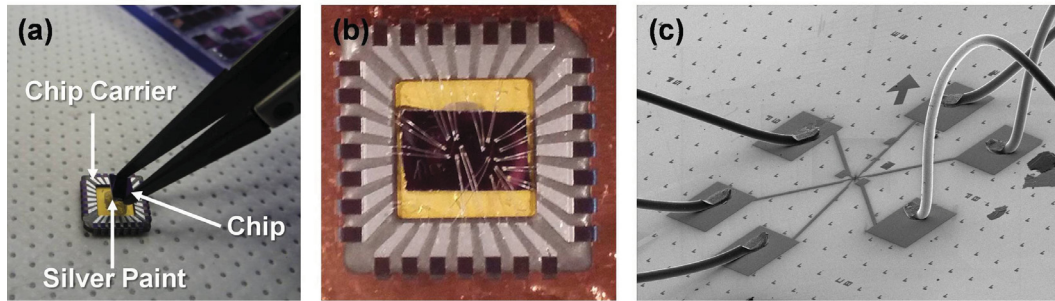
Wire bonding. (a) Image of mounting the chip in the chip carrier using silver paint courtesy of Andrew McRae. (b) Image of a wire bonded chip. Photolithography square pads are connected to the chip carrier using Al wires. (c) Tilted SEM image of a wire bonded chip. Bonds are connected from the square pads to the chip carrier pins.
